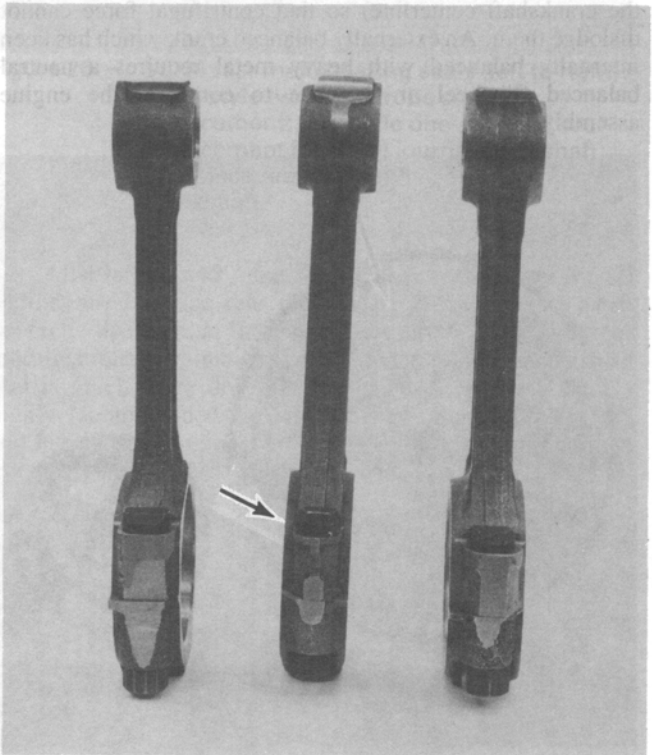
Lightweight production V6/60 rod (left) is reliable to 7000 rpm; small-block V8 rod (center) must be narrowed .086-inch to fit V6 crankshaft journal; stock small-block V8 rod (right) has same rod bearing bore and center-to-center length as V6/60 rod.
